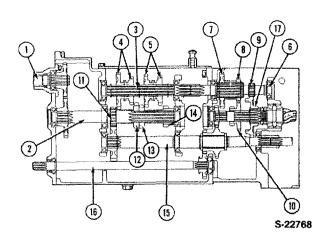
9 x 3 Gear Transmission - Cross-Sectional View and Identification
